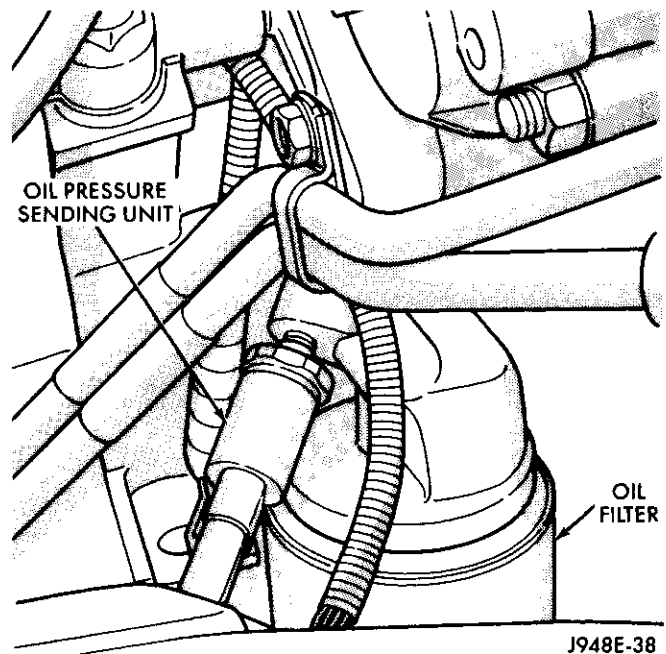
Oil Pressure Switch/Sending Unit - V-10 Engine
